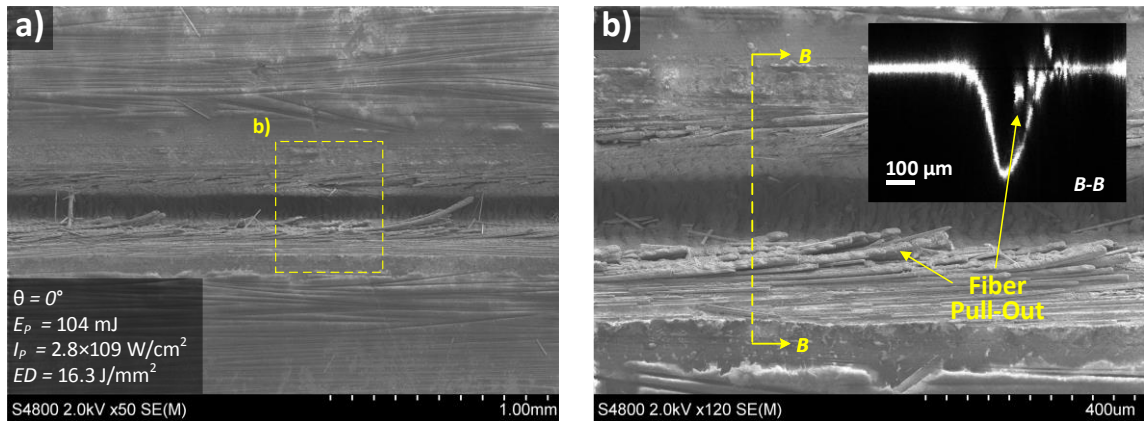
Imaging of laser cutting of cross-ply CFRP using LP mode investigating surface fiber direction of $\theta = 0^\circ$: (a) SEM micrograph showing reduced HAZ width (b) close-up view of machining zone showing extensive internal fiber pull-out. Cross section B-B shows effect of fiber pull-out on depth measurement.
